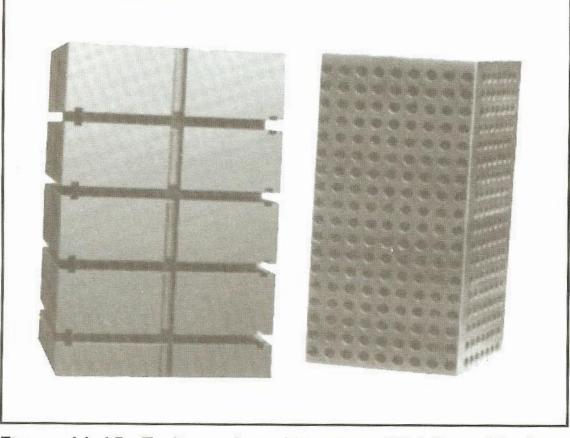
Tooling cubes. (Courtesy Mid-State Machine Products)
